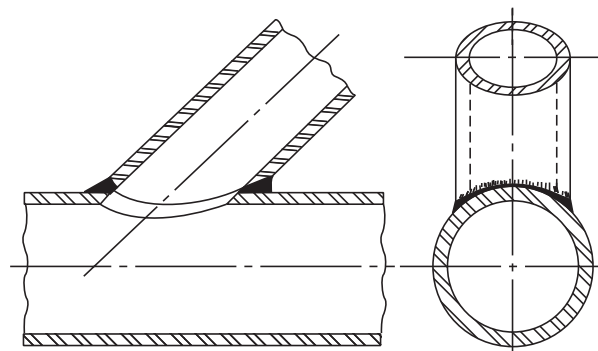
(C) Typical Welded Angular Branch Connection Without Additional Reinforcement
